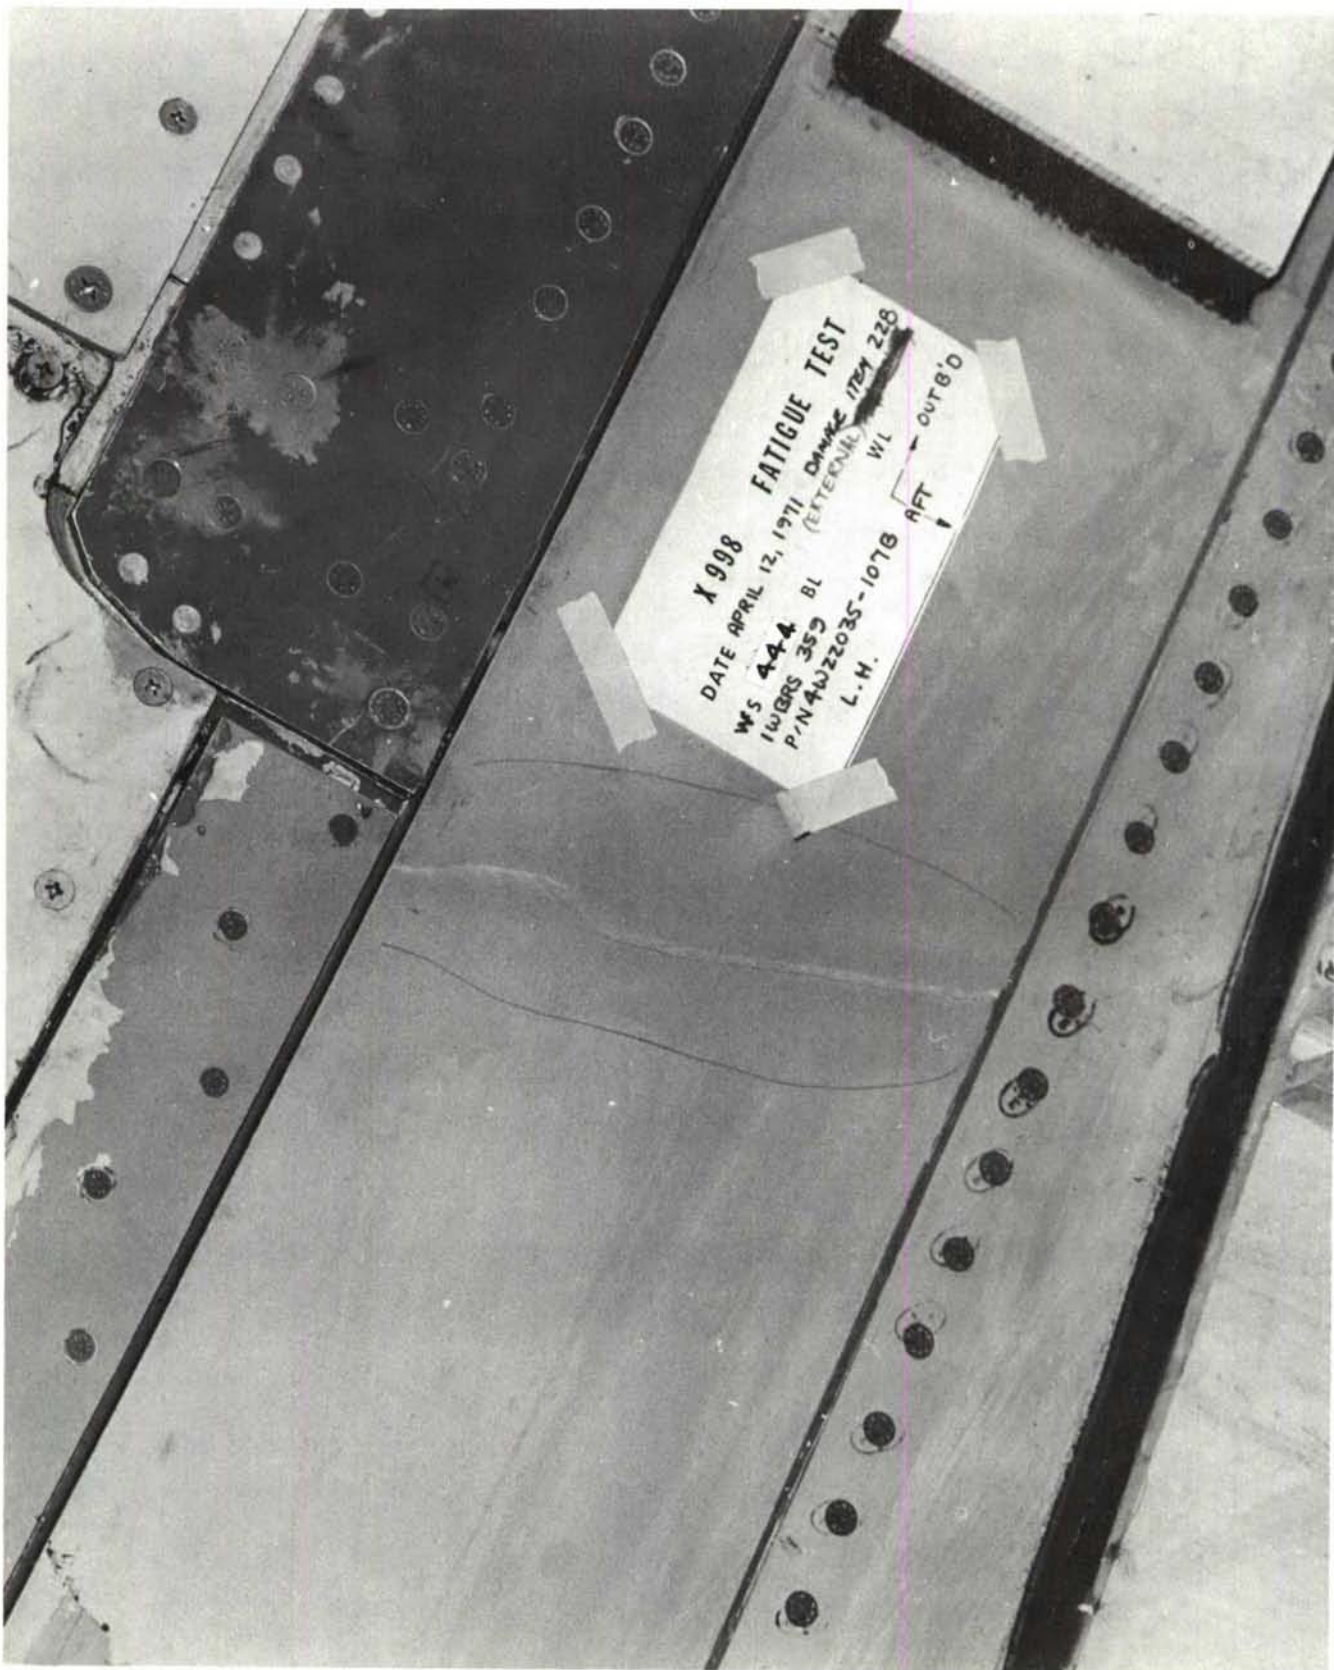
DAMAGE TO THE INNER WING FRONT BEAM CAP, OUTSIDE SURFACE
